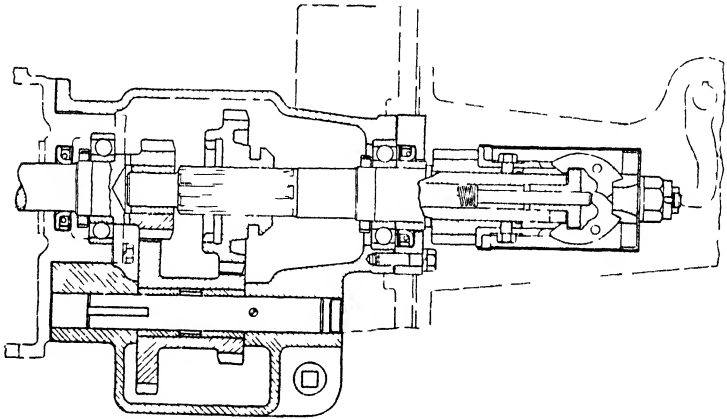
STARTER GEAR OF CATERPILLAR ENGINE.
